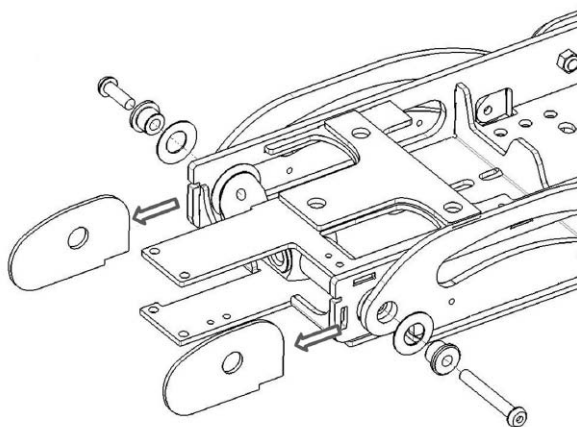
Remove the two screws holding the seat tilt shaft and associated parts.
